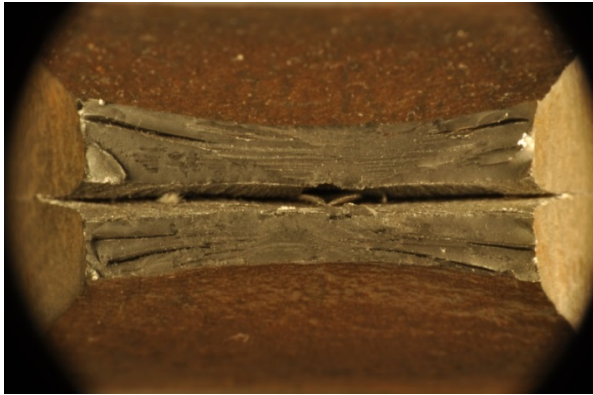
Top view of fracture surface for expanded longitudinal tensile test specimen.
